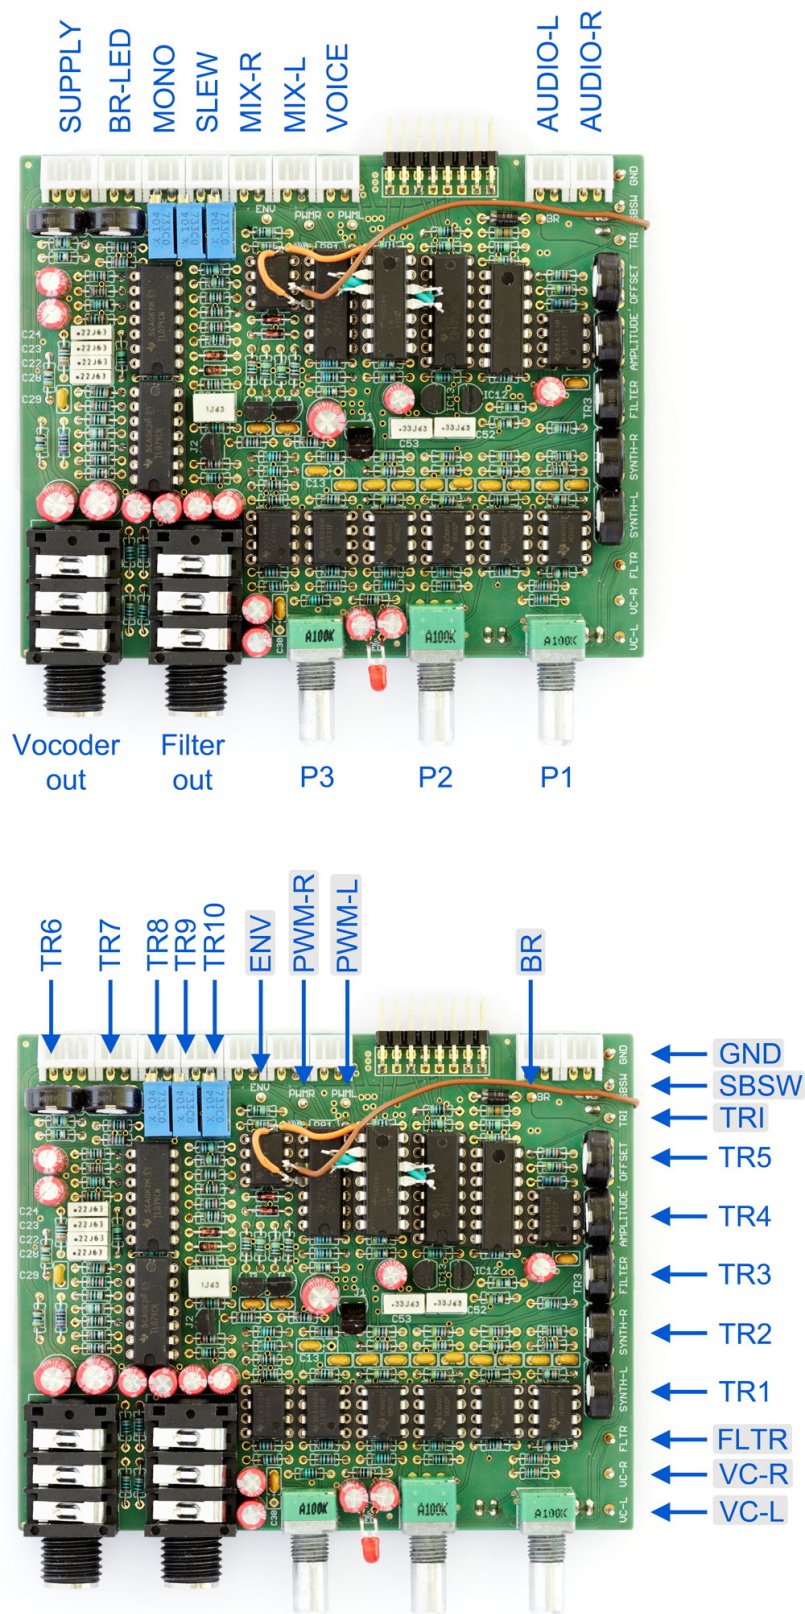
Output board with the connectors shown at the top and the trimmers and test pins shown at the bottom. Note that this photo shows the prototype with minor last-minute tweaks. These tweaks are fully integrated in the final version of the PCB.
